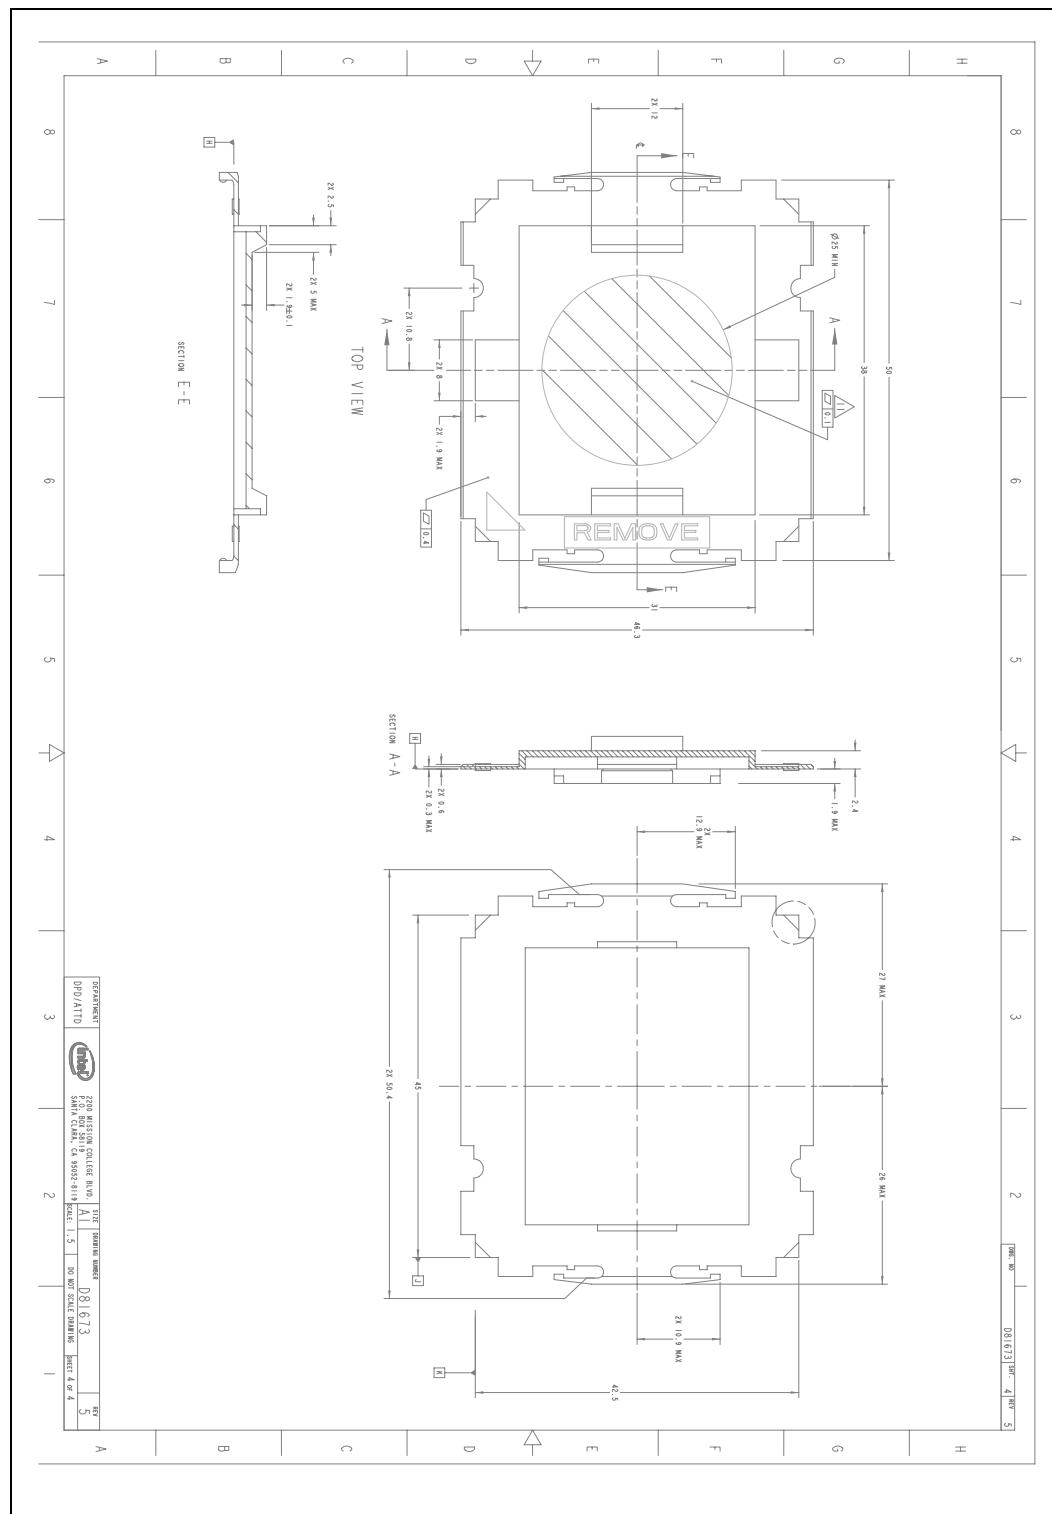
Socket Mechanical Drawing (Sheet 4 of 4)
